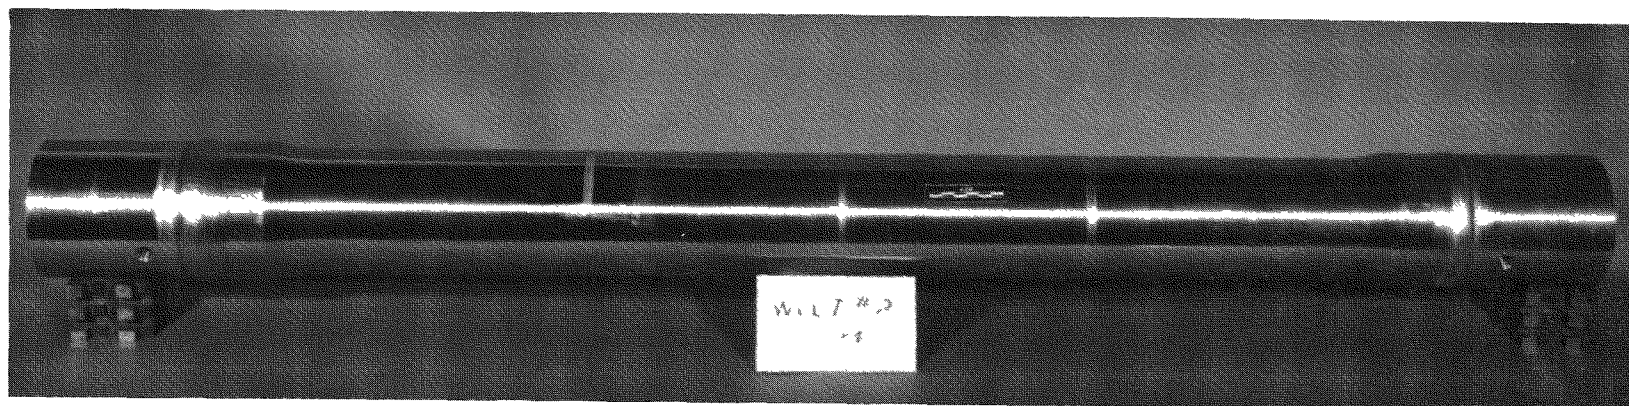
Photograph of welded cylinder creep test specimen.
